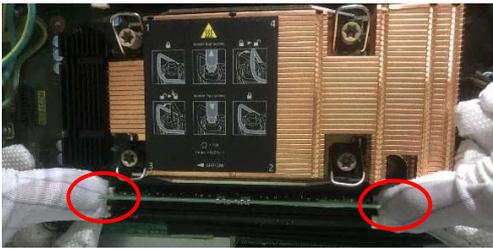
Use to PH1 screwdriver to uninstall the screws and detailed parts of graphic card assembly.
